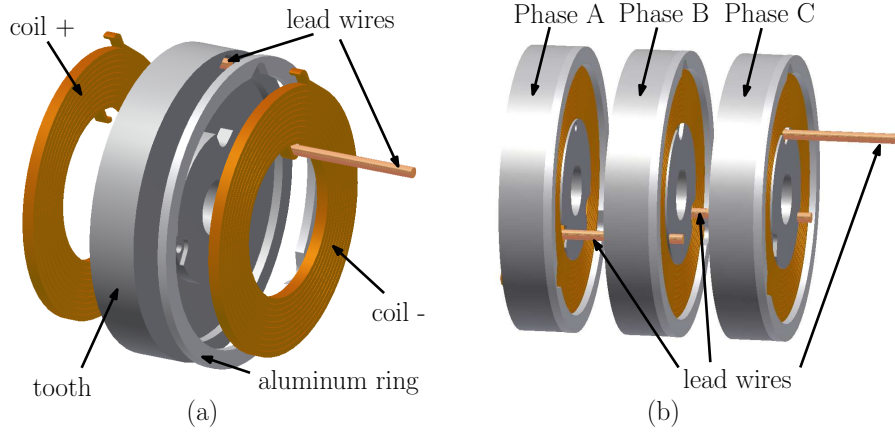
Exploded view of (a) one segment (b) three segments.
